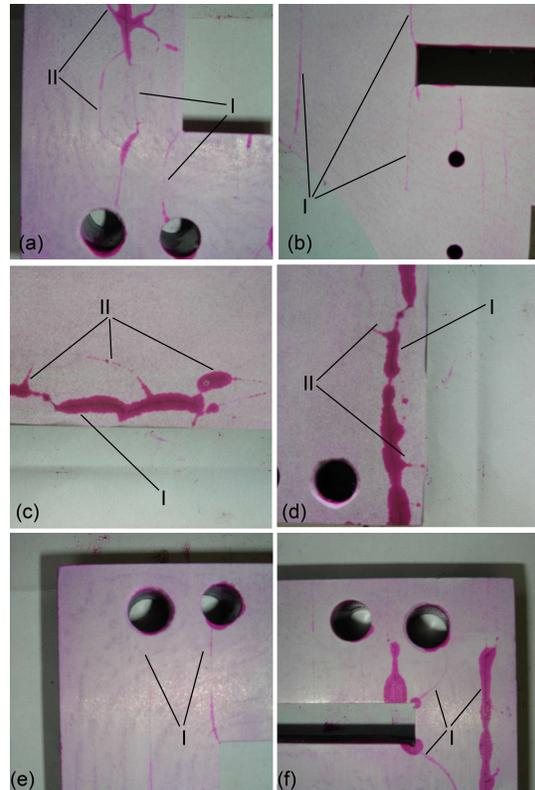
Inspection using penetrating liquids. Parts of the die (a) lower left corner, (b) inner side of cutting area, (c) internal of the complex cutting gap, (d) lower right side, (e) upper left corner, (f) upper right corner
